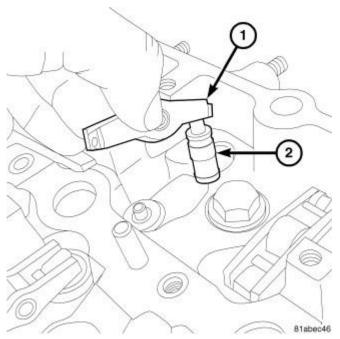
ROCKER ARM AND LIFTER ASSEMBLY
